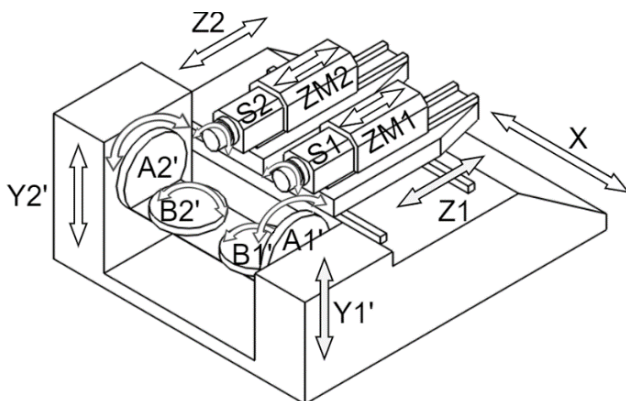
Diagram of the axis sliding systems of a double-spindle machining centre
